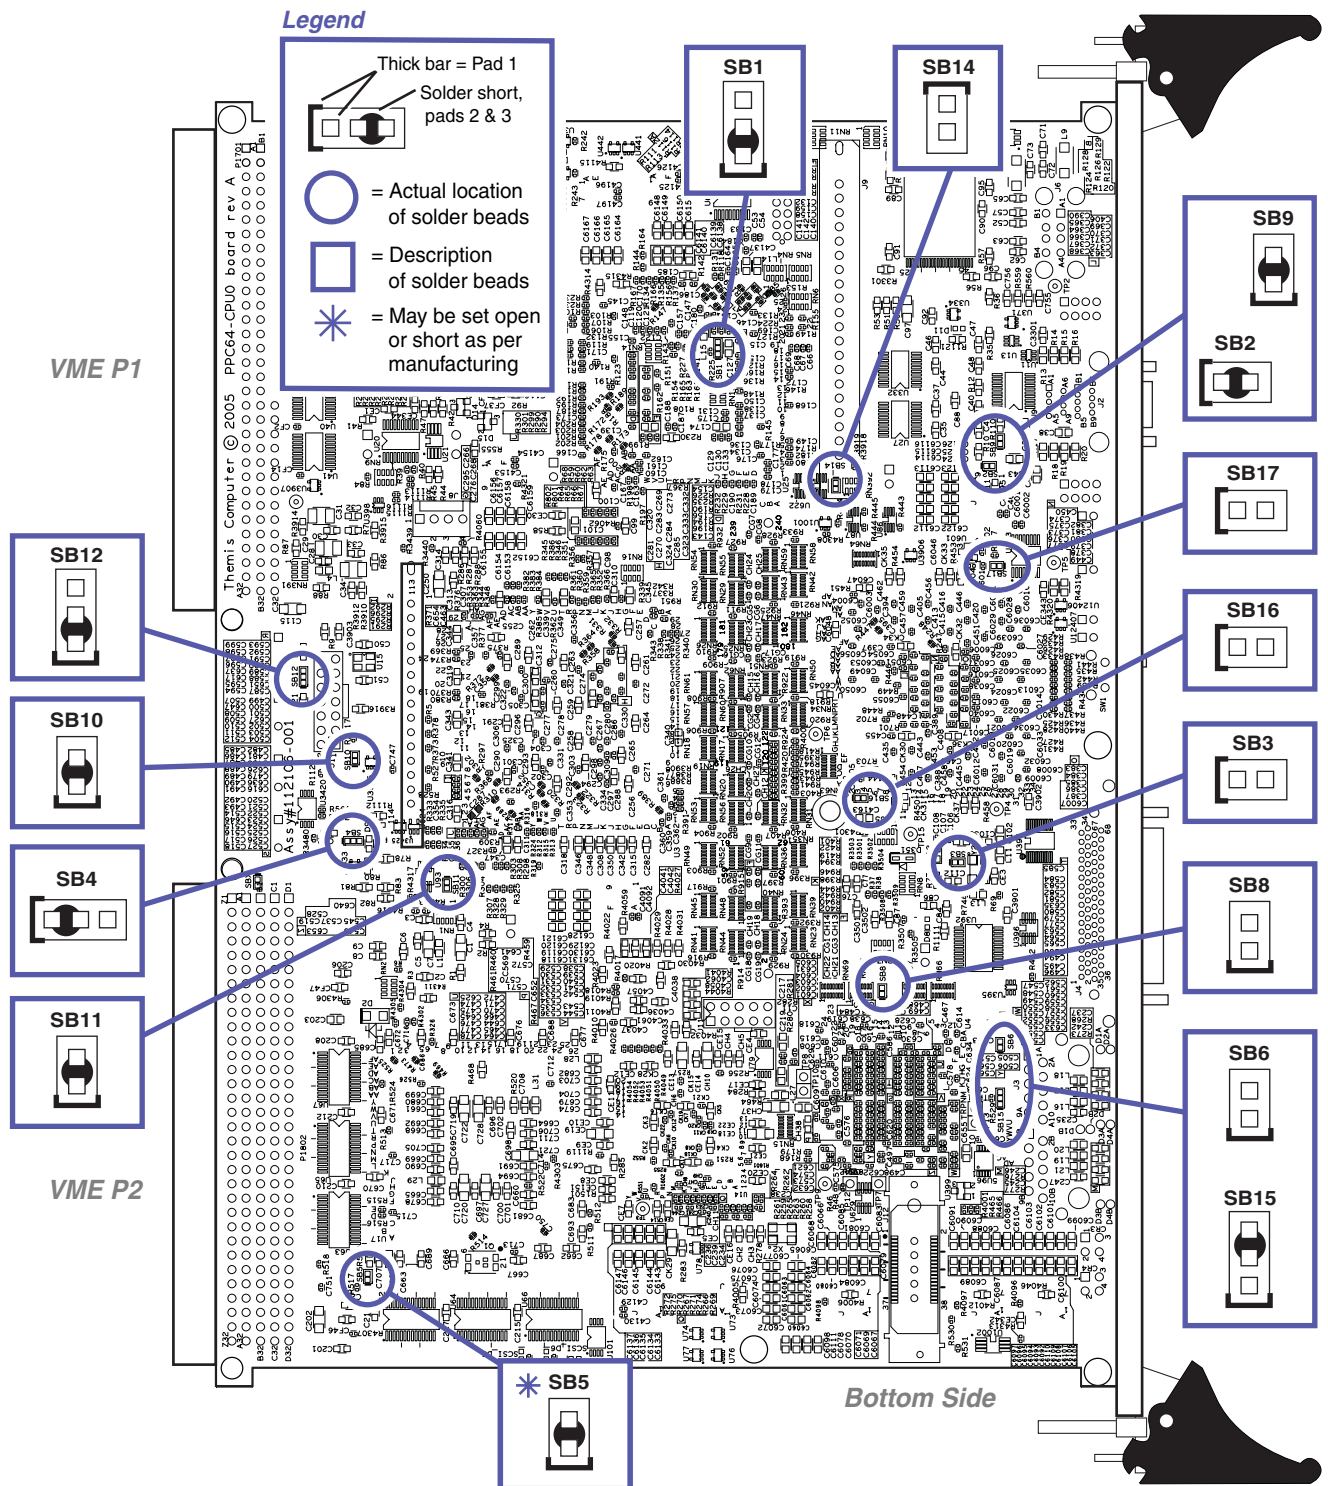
TPPC64 CPU-0 Baseboard Solder-Bead Locations (Bottom Side)
